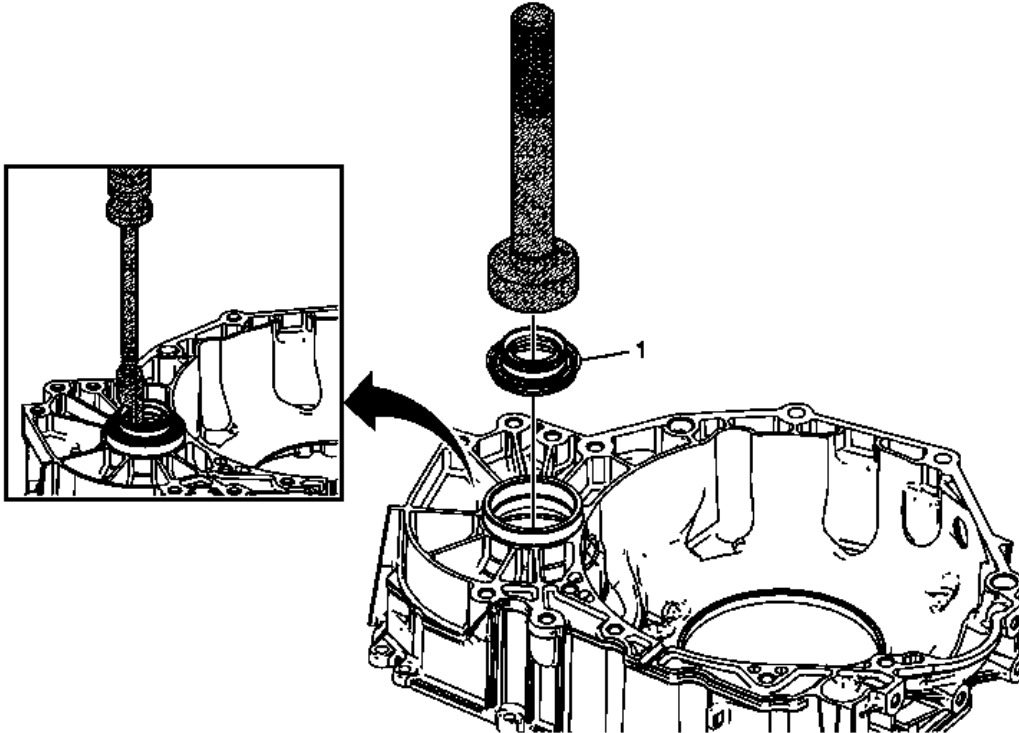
View Of Front Wheel Drive Shaft Seal - Torque Converter Housing Side
